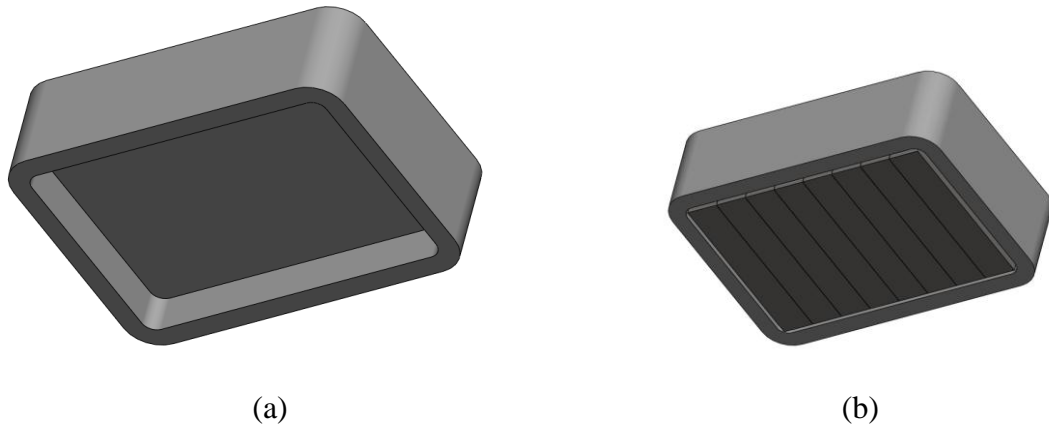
(a) Halbach magnets array housing model, (b) Model of Halbach magnets array assembly.
